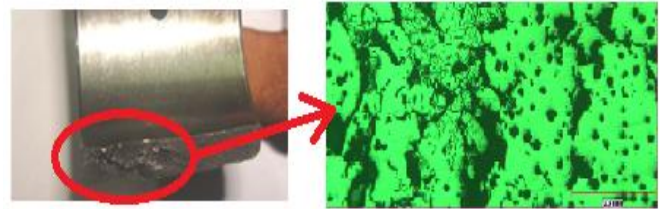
Fracture area of the castings with oxide and sulphide inclusion
